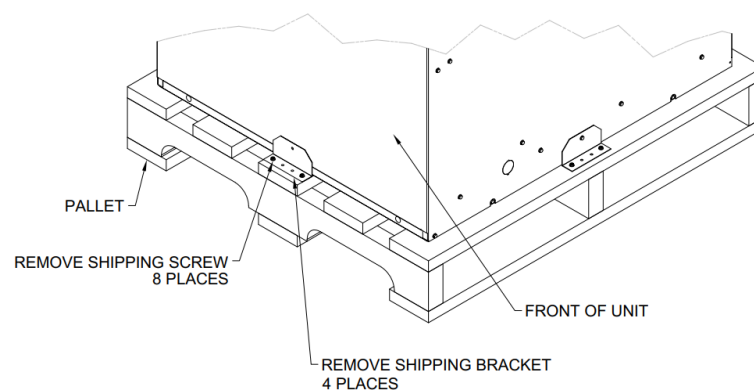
Standard Packaging with Shipping Brackets – Front View
